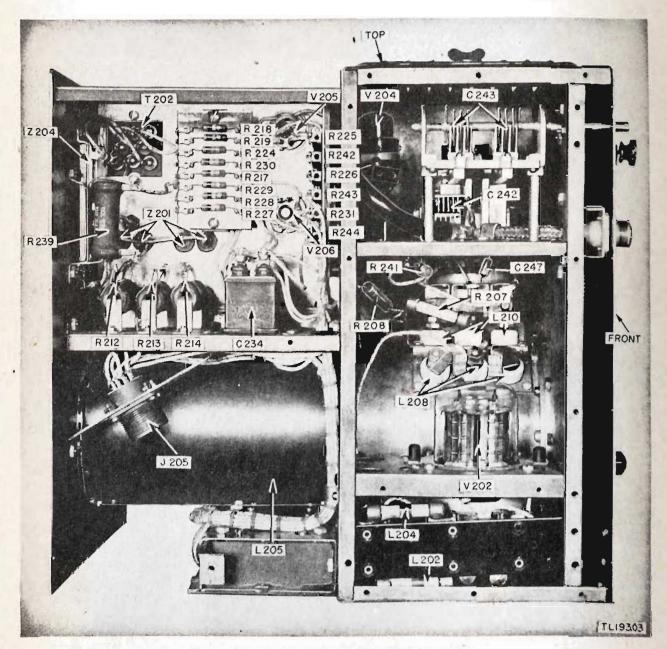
Radio Transmitter T-30/TRC-8 (XC-3), chassis, left side panel removed.
